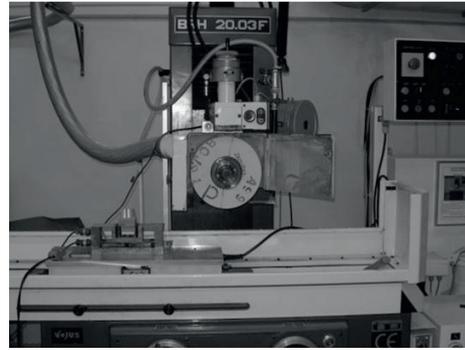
A99 K80 9V OPEN F 20.03 grinding wheel.
